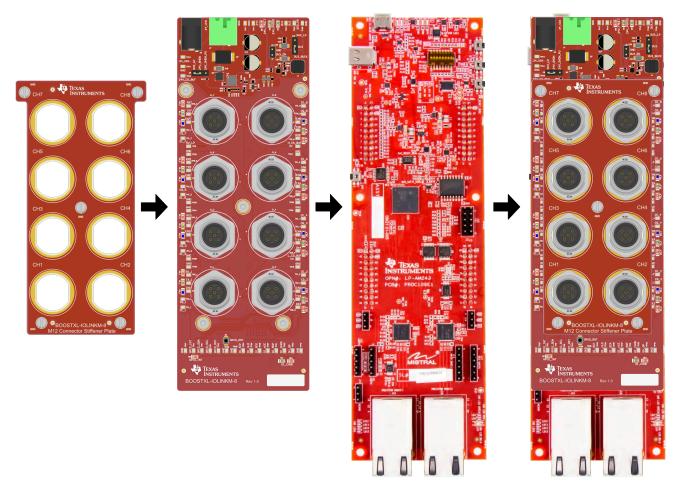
BoosterPack and LunchPad Mechanical Assembly
